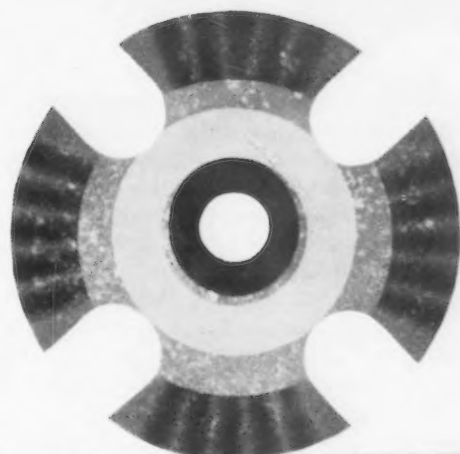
X-ray photograph of a part obviously porous, which fractured under 2000 lb compression load.
